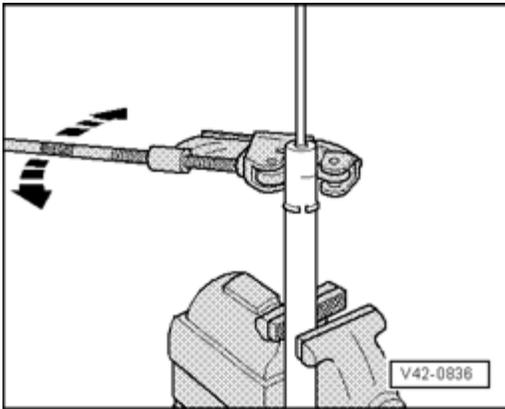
Cutting Through Outer Tube Using Pipe Cutter
